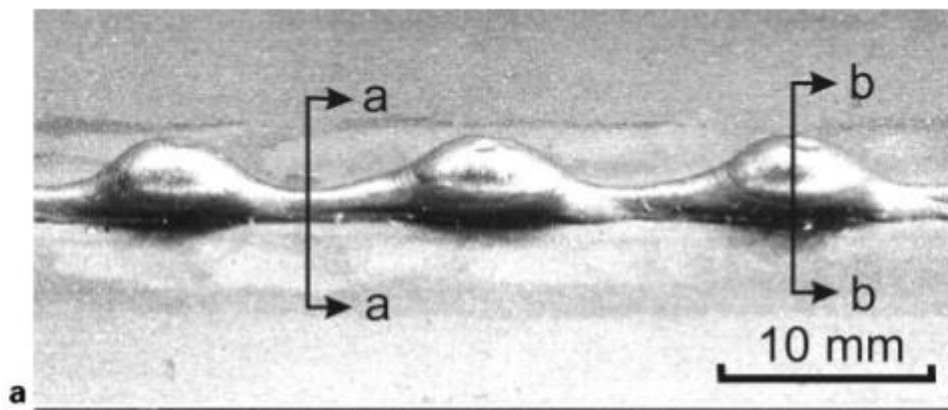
Defects in welding at high torch speeds is hypothesized to be due to instability in the weld pool. From [13].
